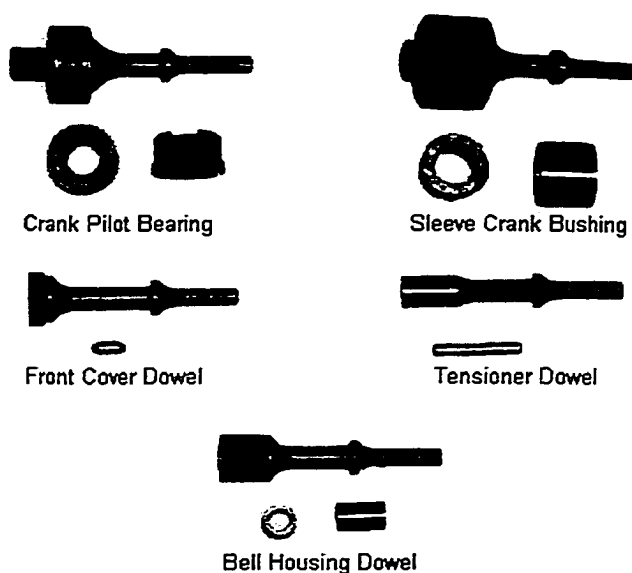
The five different parts to be inserted and corresponding insertion tool
